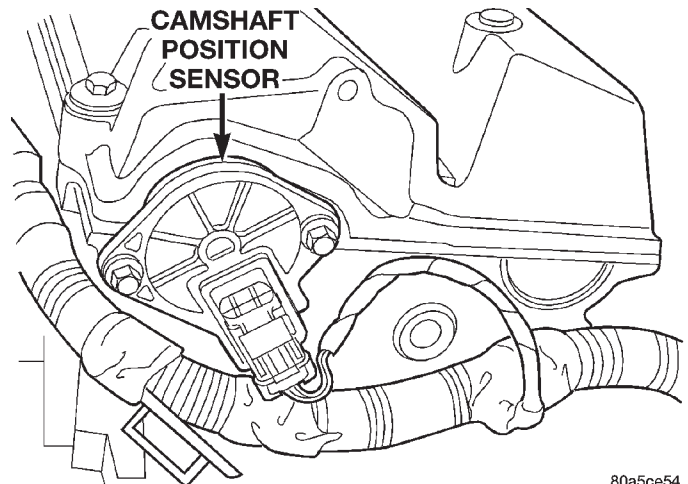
Camshaft Position Sensor—2.4L DOHC
